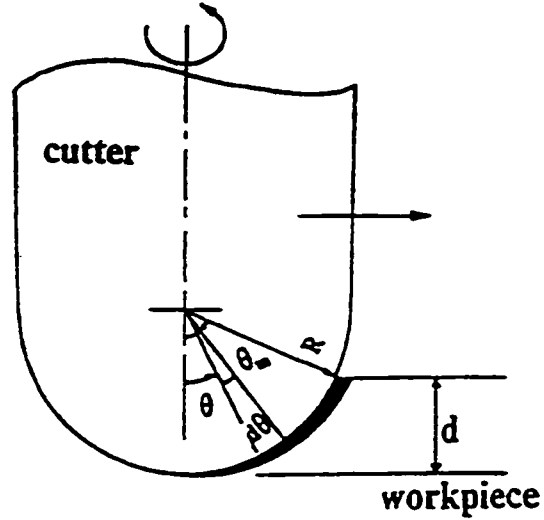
Chip Section Geometry in Ball End Milling [2]
